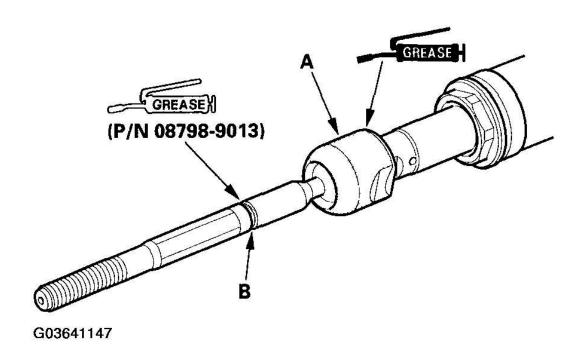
Applying Grease To Rack End Joint Housing And Boot Grooves Courtesy of AMERICAN HONDA MOTOR CO., INC.
